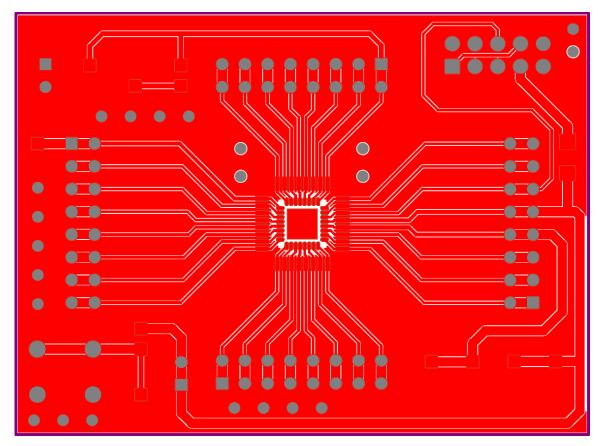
IS3XCS8977 EB PCB Layout - Top Layer
